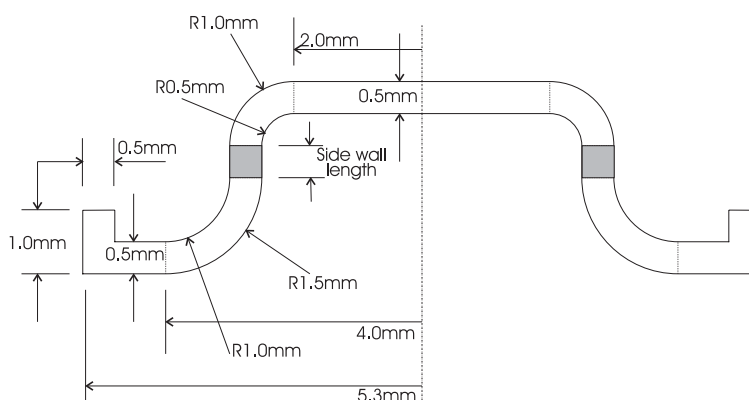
Cross-section of a modified dome with a longer side-wall.
